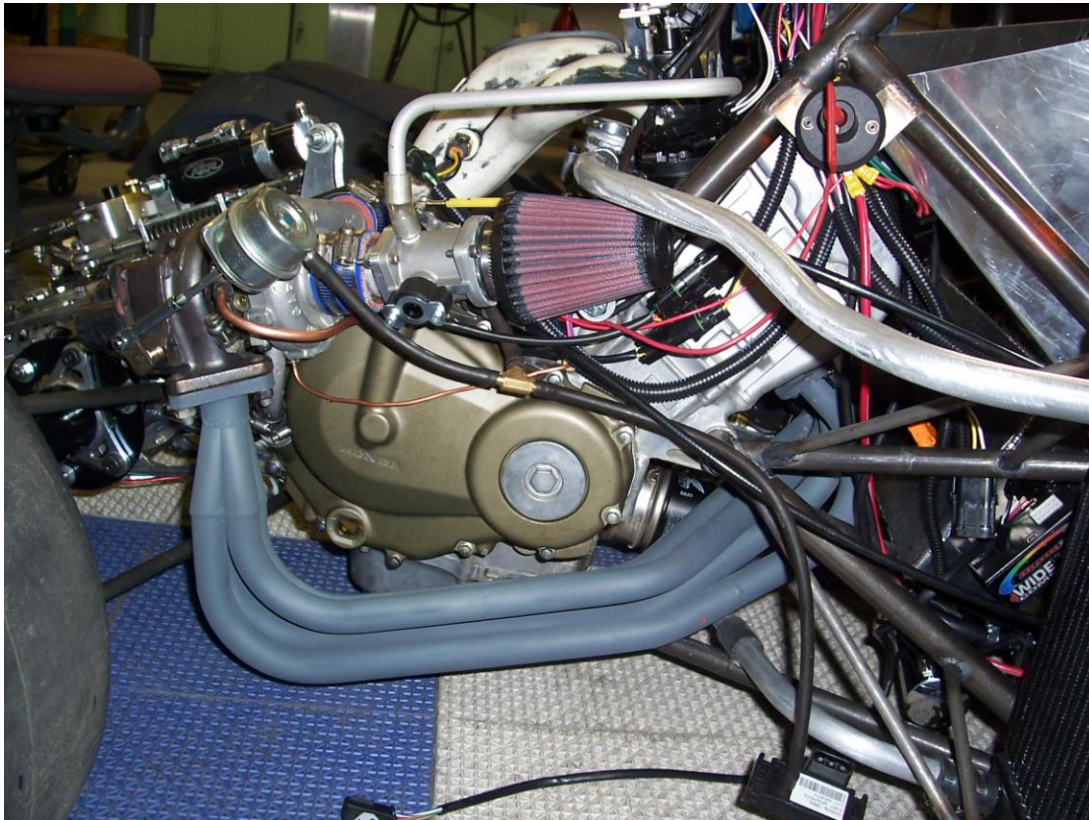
Final exhaust design welded and mounted in place. Notice how the design follows the crank case shape along the bottom and just clears the oil filter located on the front of the engine and below the pipes.
